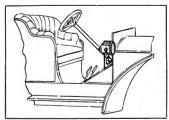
Novel Method of Fitting Small Acetylene Swinging Lamp to Delivery Car.
